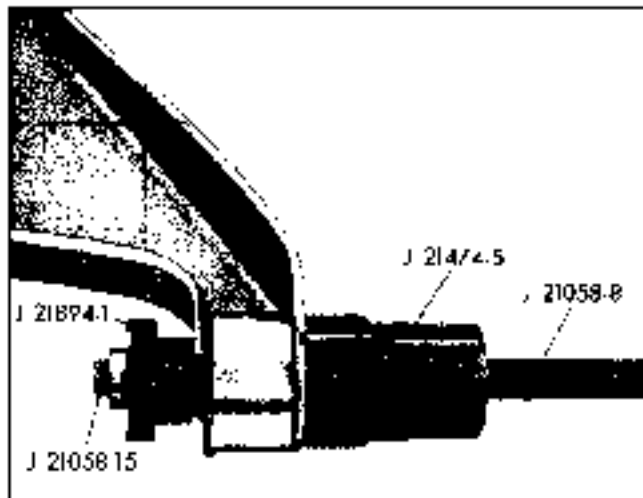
Removing Pontiac Lower Control Arm Front Bushing or Tempest Lower Control Arm Rear Bushing
